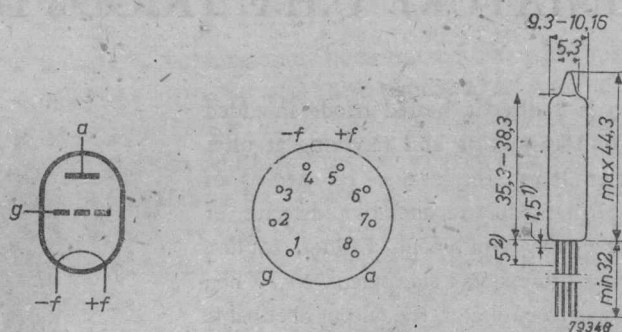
Electrode arrangement, electrode connections and maximum dimensions in mm.
